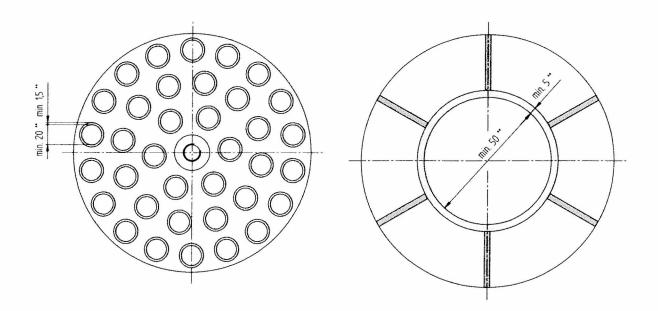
and 6: Centering frame ZG-OA-NA/SA (different cross sections) Drawing no. 1-090-110-00-00
